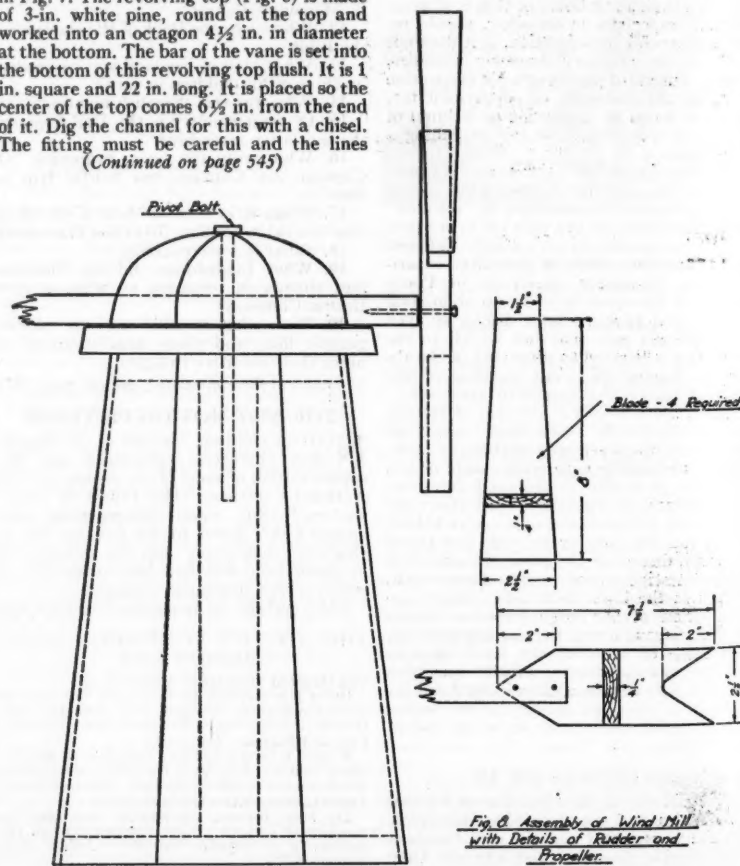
Assembly of Wind Mill with Details of Rudder and Propeller.
